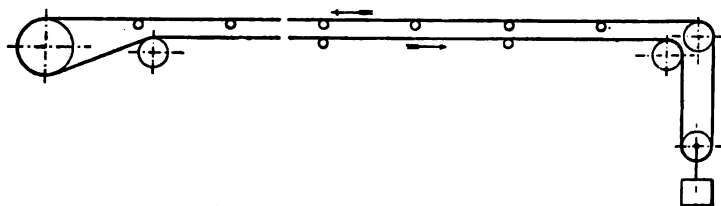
Mode of Tightening Band Conveyor at Terminal.
